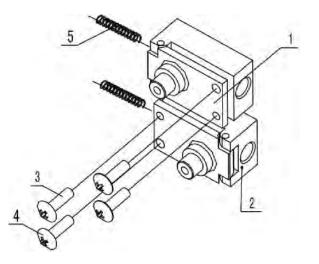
(1) Driven Wheel Seat (Adjusting Block), (2) Driven Wheel Seat (Adjusting Block), (3)/(4) Adjusting Screws, (5) Springs
